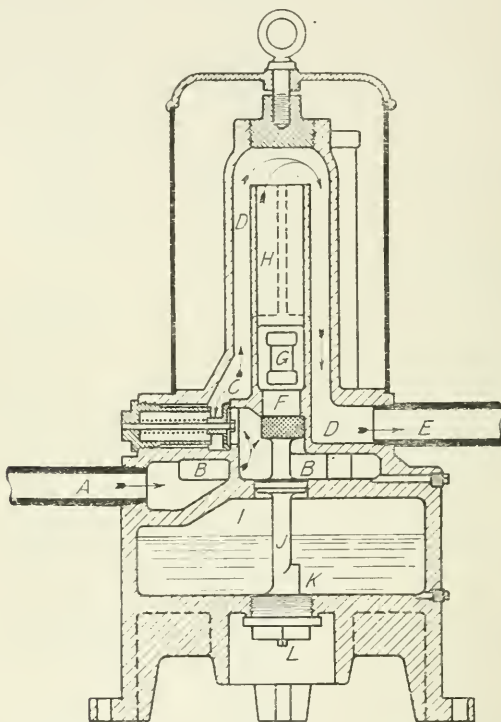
SECTIONAL VIEW OF INTERNAL COMBUSTION REHEATER
